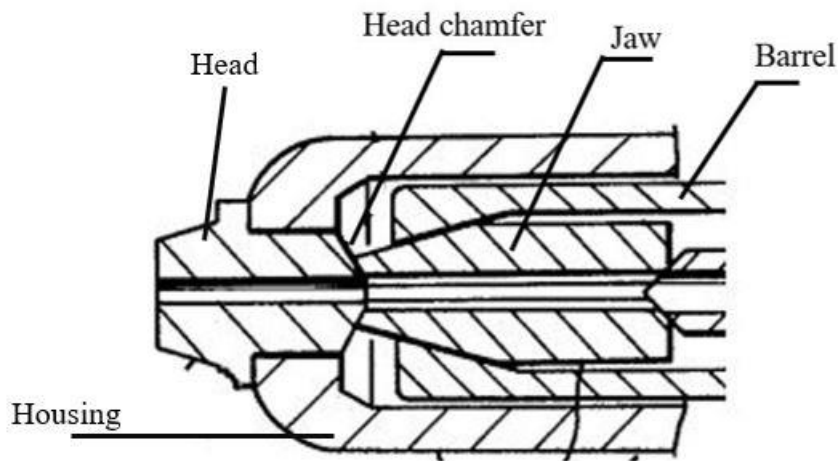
Rivet gripping mechanism of hand riveter (Chinese patent CN201728323U)
